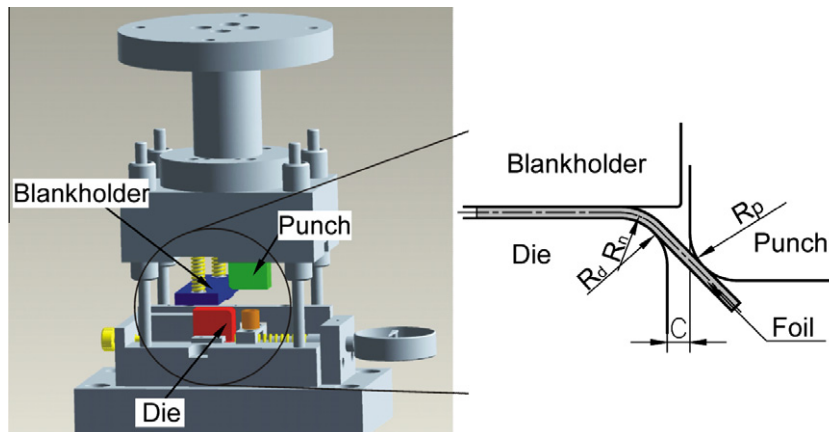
Three-dimensional geometric model and schematic set-up of the free microbending tool.
